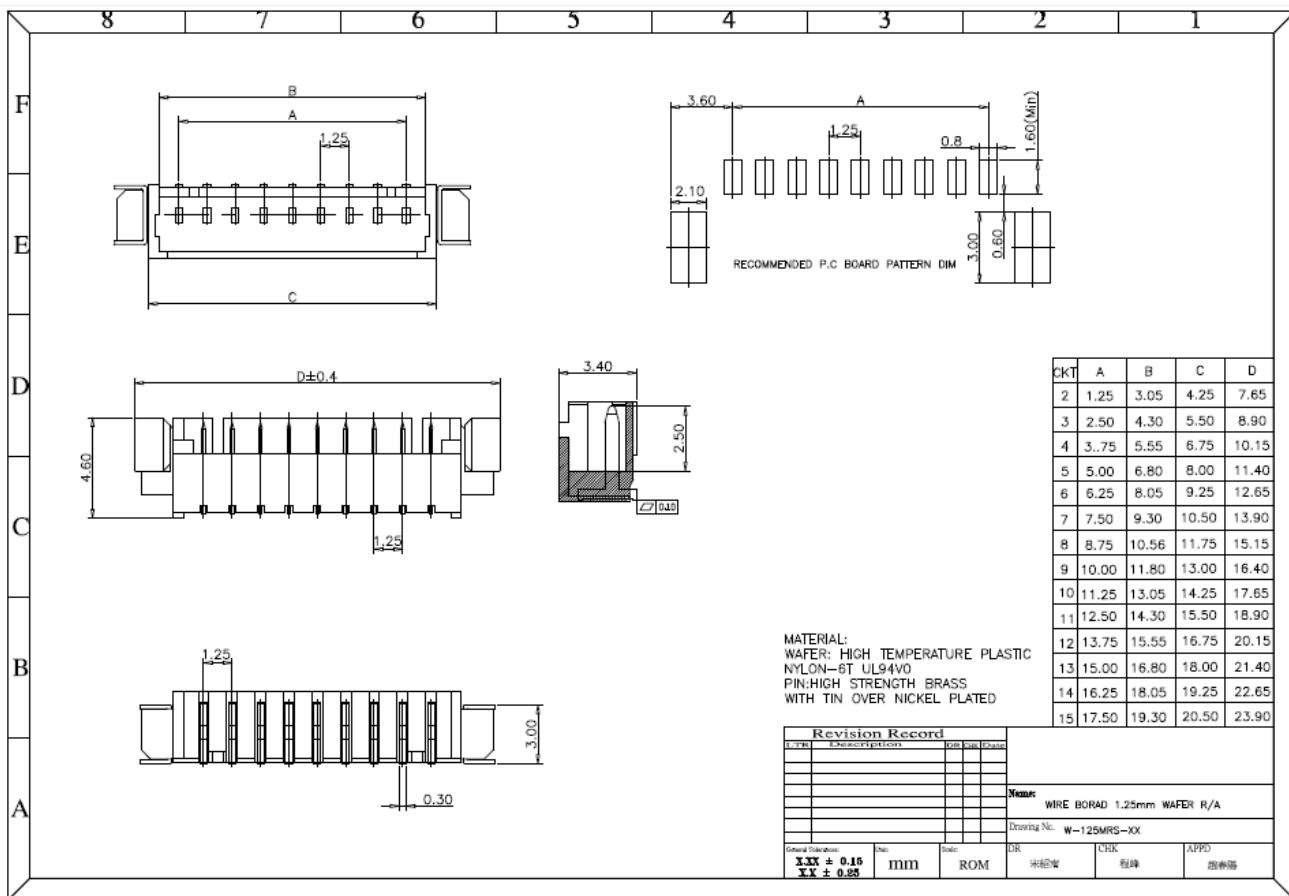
Wire to board SMD 1*4P 90° Connector Drawing (CN4)
